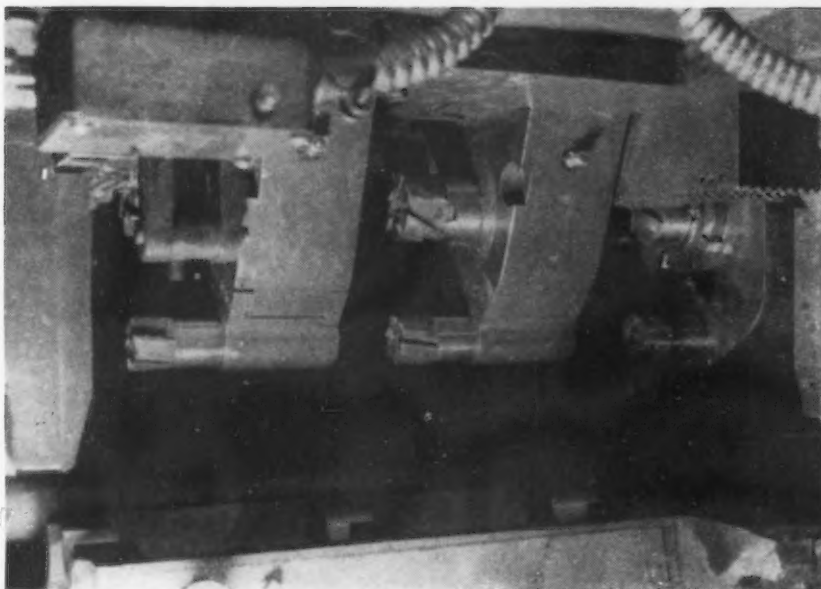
After the scale is removed on all flat surfaces, the cylinder bores are roughed out, one bank at a time. The block is clamped by hand in a cradle-type fixture which is moved axially 0.7 in. when it is rotated 90 deg. for the second bank. This movement is hydraulically actuated. Stellite blades in cutters are used and limits are 0.002 in. endways and 0.003 in. sideways on location of bores.
